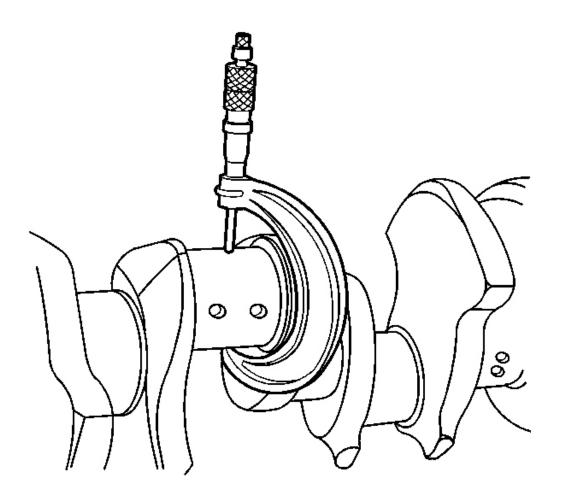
Measuring Crankpins For Out-Of-Round & Taper Courtesy of GENERAL MOTORS CORP.
